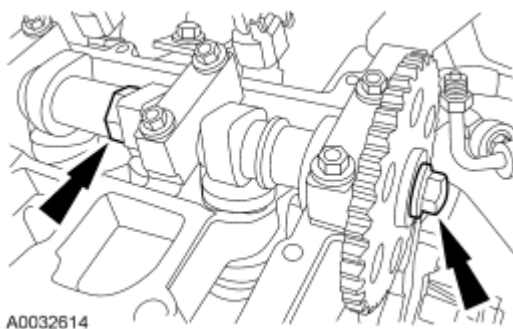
Locating Cam Holding Area And Sprocket Bolt
